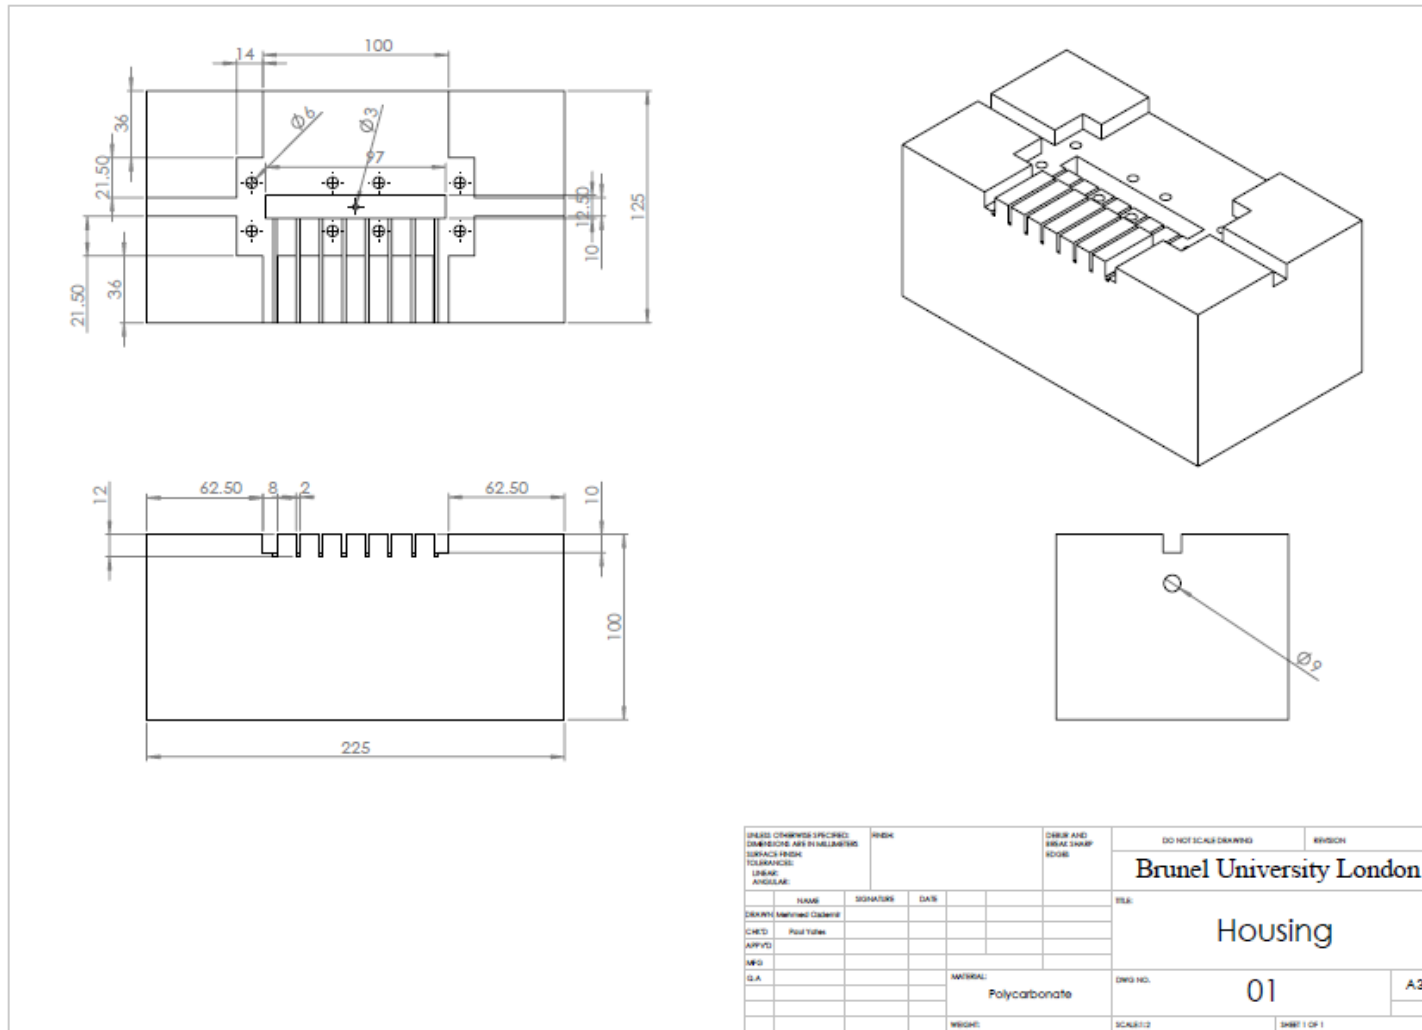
Engineering drawing of the polycarbonate housing, dimensions in mm.
